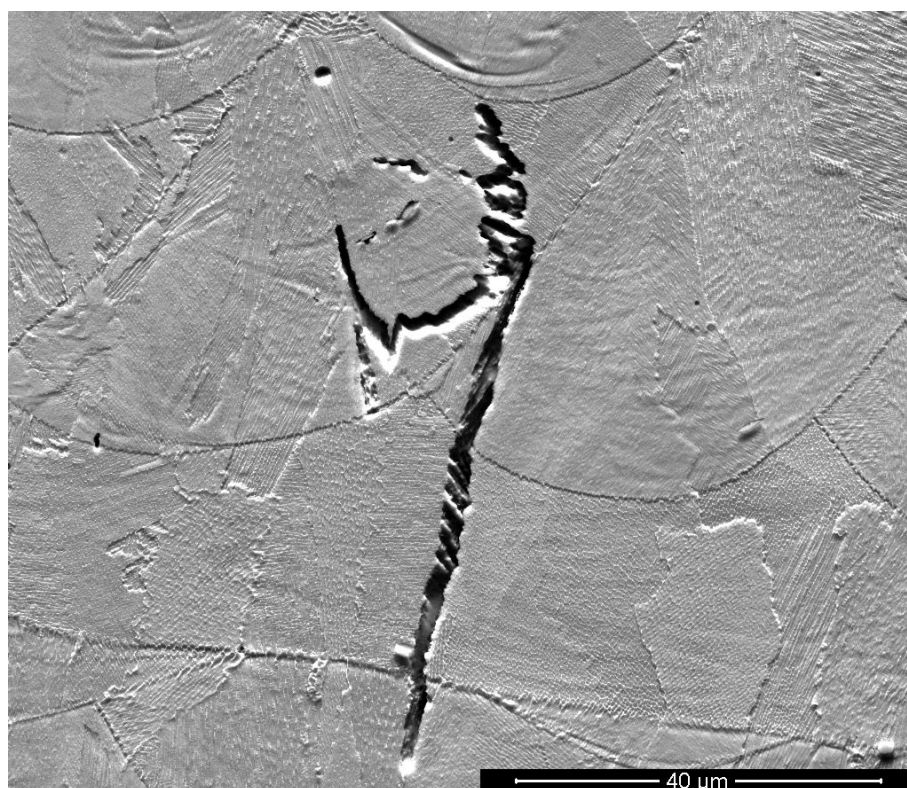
SEM image of a high energy sample (190 W, 2.2 m/s, 40 μm) showing large 'zigzag'-like cracks. Solidification cracking can be the cracking mechanism.
